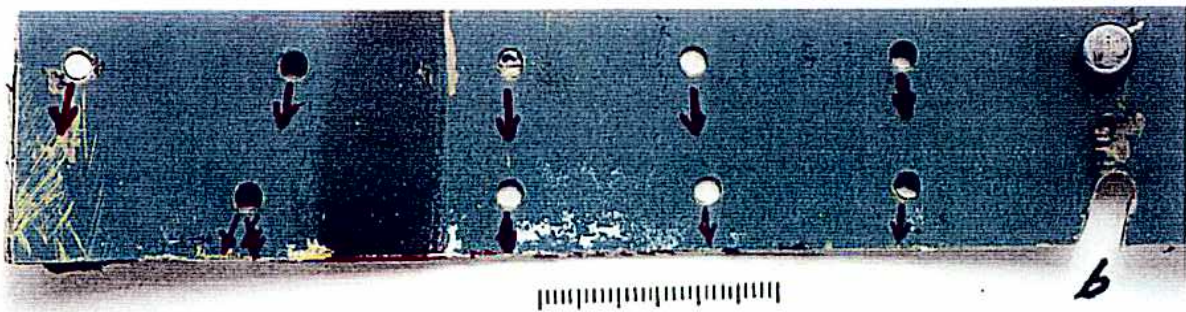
Interior surface location from the L/H side upper surface of the rear tail boom unit, representing the rivet joint in question. Bore edge deformation is marked by red arrows.
